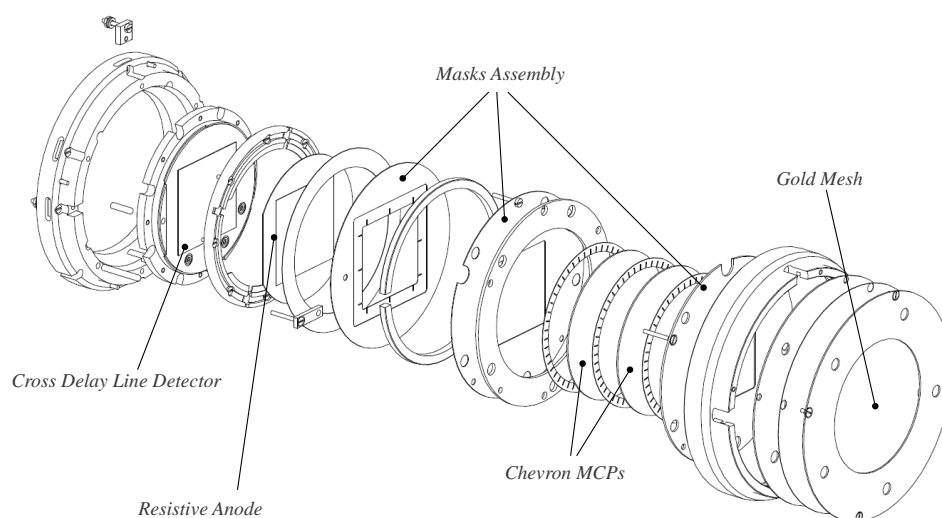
Exploded view of the two-dimensional cross delay line detector assembly mounted on the ARPES-TPES end station.
